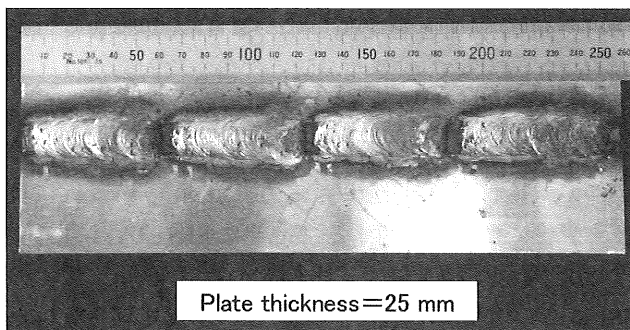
Appearance of welded joint of the Ni-base alloy from which specimens for the CBB test were cut.
